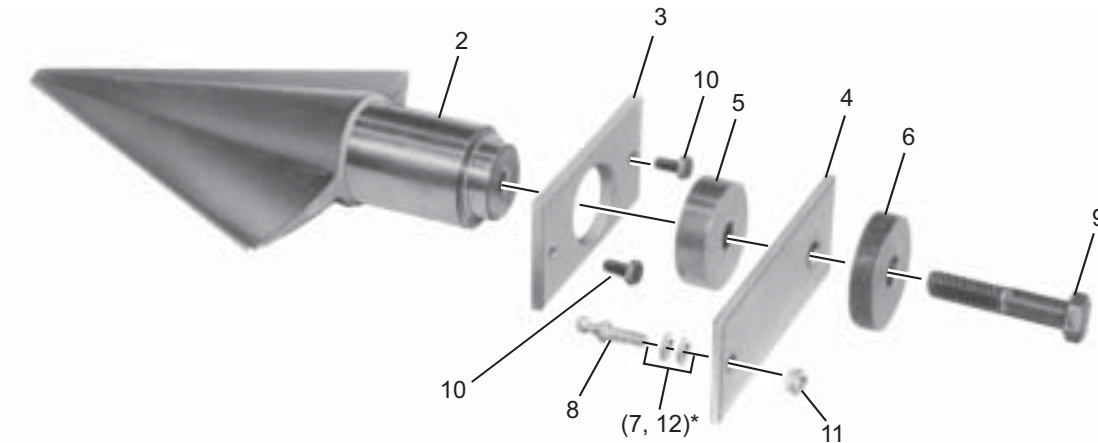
INTERNAL PARTS - PRE-ROTATION VANE ASSEMBLY
